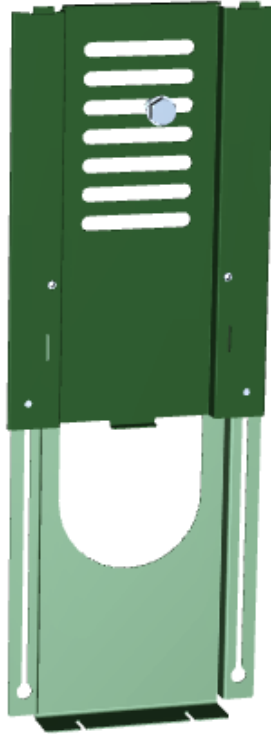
Attach the Mounting Bracket to the Transformer's Lifting Nut
